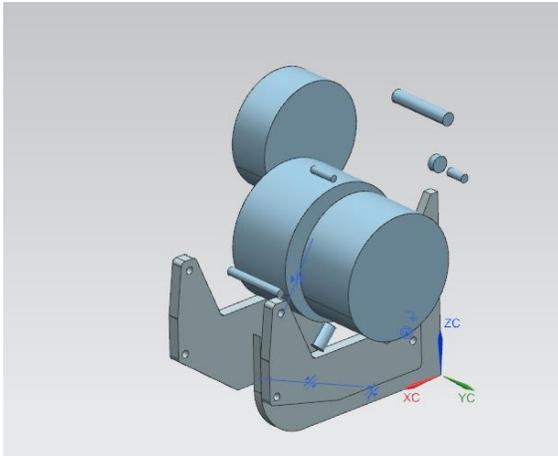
CAD Model Assembly of the Motor and Motor Mount Plate Showing all Geometry
